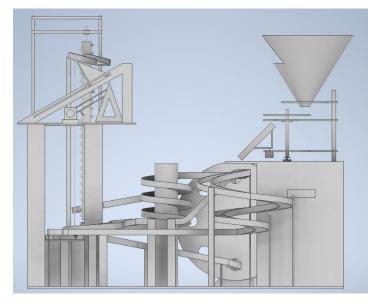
Inventor Model Elevation view Fig. 5-3: Inventor Model side view
